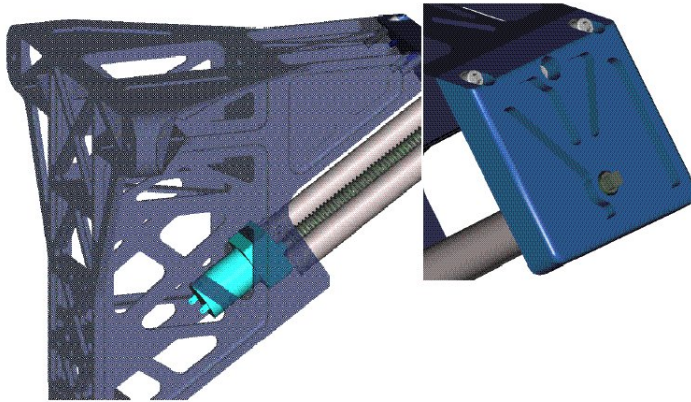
2-20-02 - PILOT ADJUSTMENT MOTOR AND MECHANICAL BACKUP
